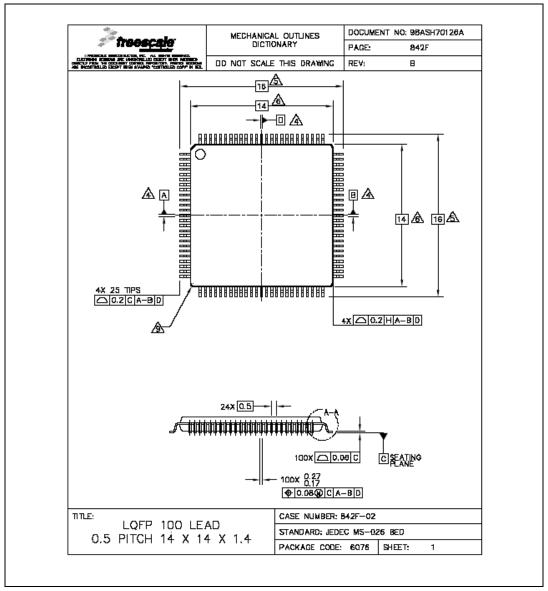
100 LQFP package mechanical drawing (Part 1 of 3)
